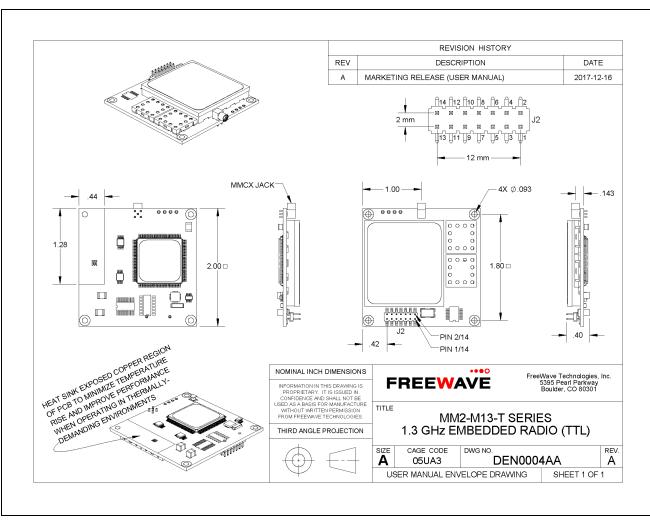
MM2-M13-T and -LV-T Mechanical Drawing
